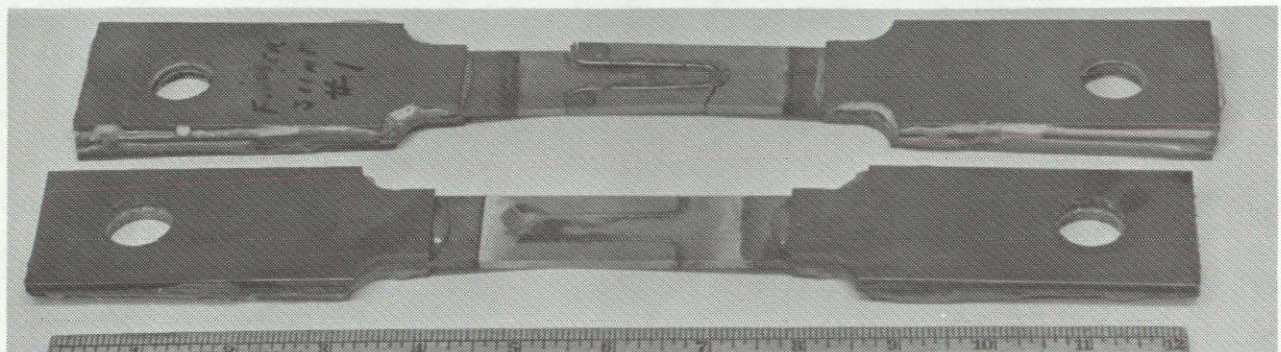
BRAZE JOINT SPECIMENS AFTER TEST
